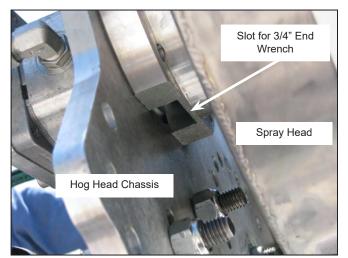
Location of slot in thru-shaft motor mounted on hog head for 3/4" open end wrench.
